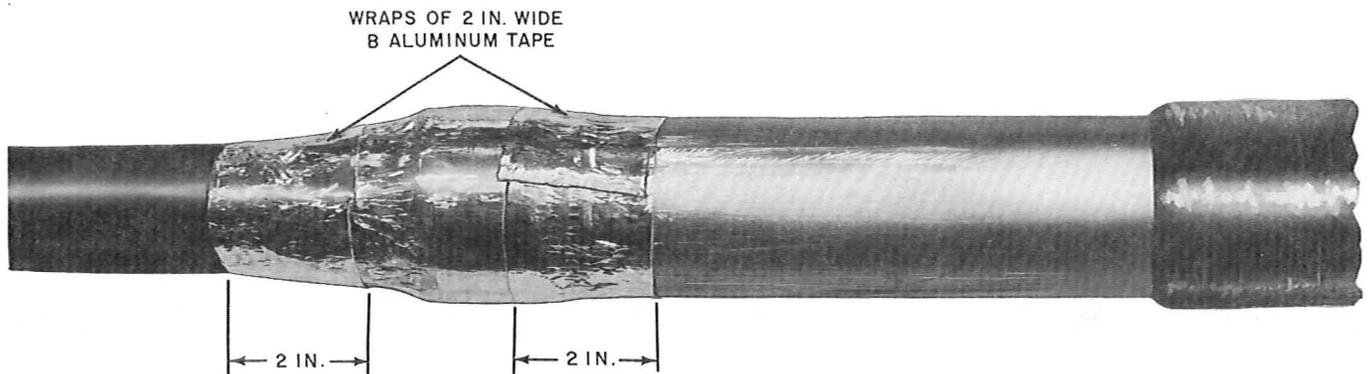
A 2-inch Width of B Aluminum Tape Placed Over End of 4-inch Wide B Aluminum Tape
